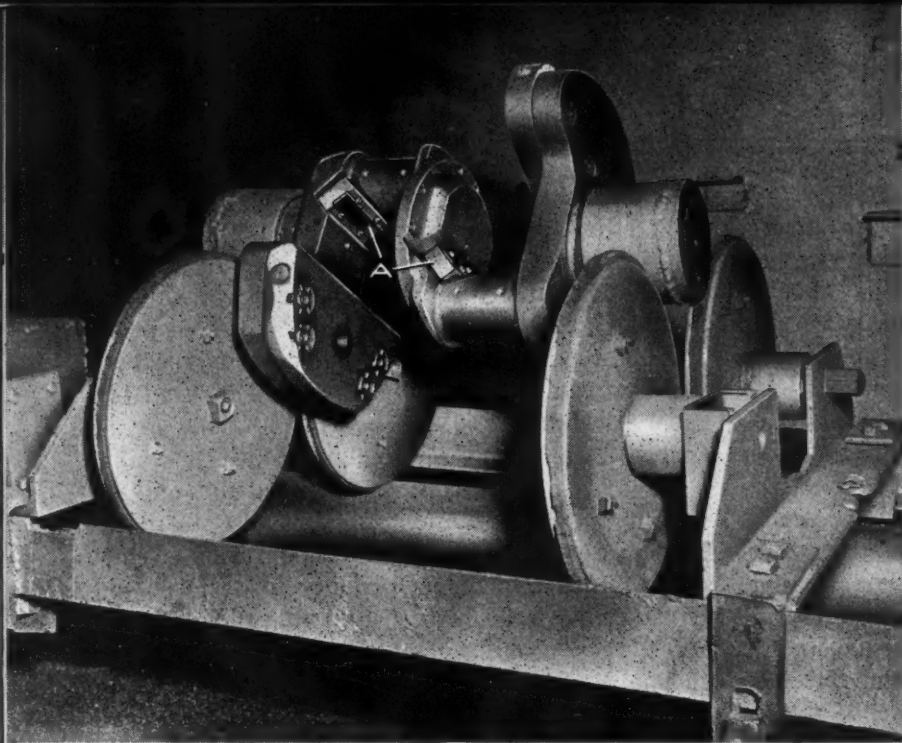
Method of Using Almen Test Strips to Determine the Peening Intensities Produced in Critical Areas of a Crankshaft
